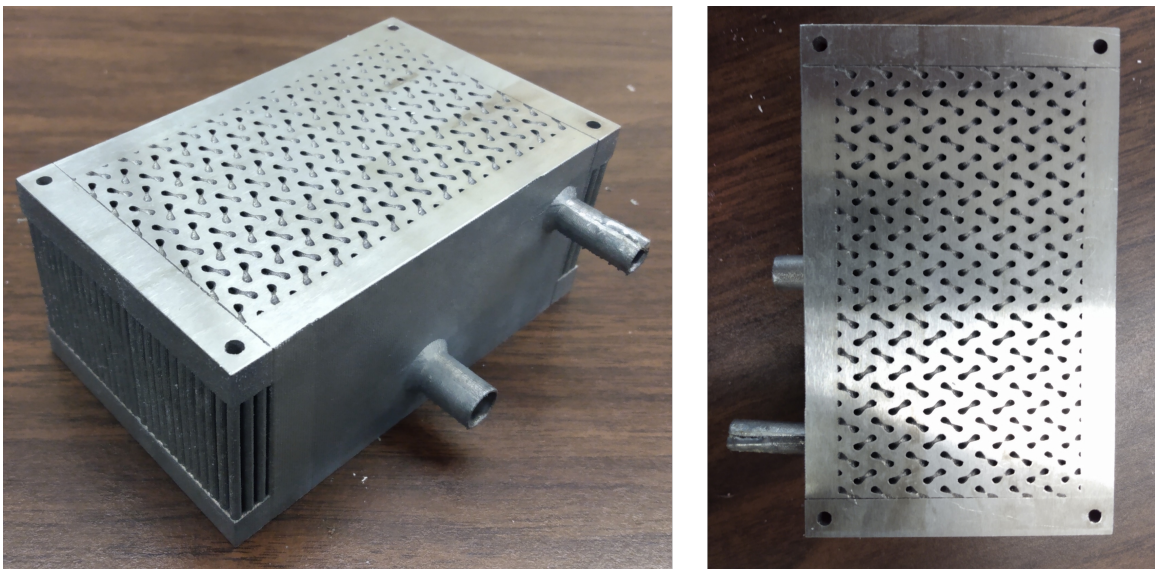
Printed prototype with gyroid core of unit cell size (7, 7, 10)
